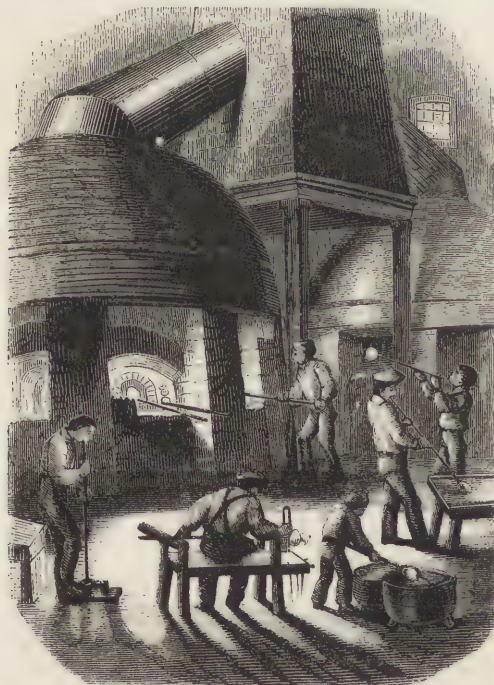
ELEVATION OF THE FURNACE AND INTERIOR OF FLINT-GLASS-HOUSE.
